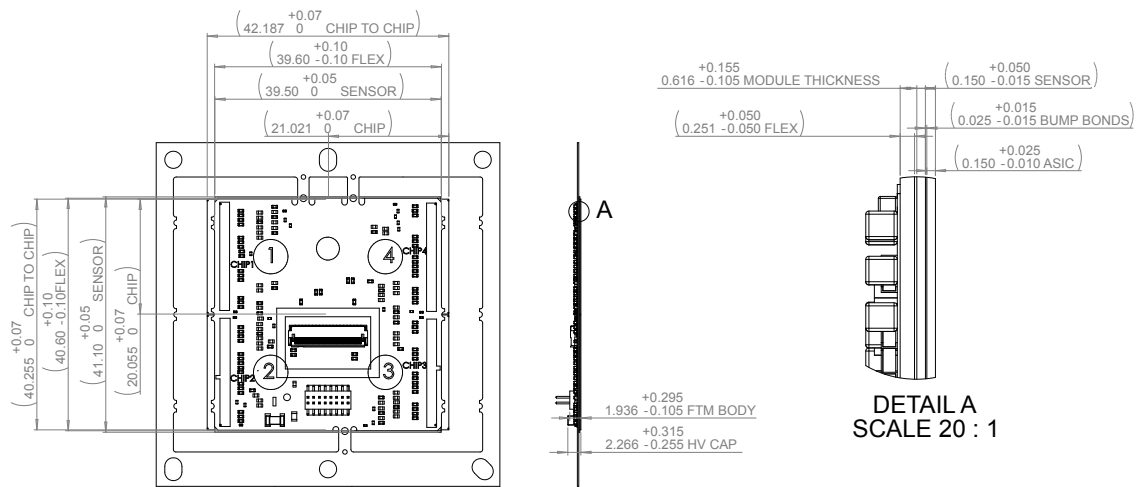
Assembled module drawing (v11 26.1.2023) for modules with 150  $\mu\text{m}$  sensors and flex v3.2, showing specifications in  $xy$ -dimensions and thicknesses in mm. Image from [190].
